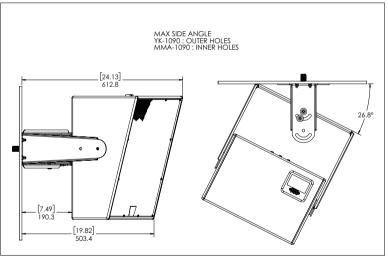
CS1090 YK-1090 and MMA-1090 Extended Positions with Maximum SIde Angles [Inches] Millimeters
